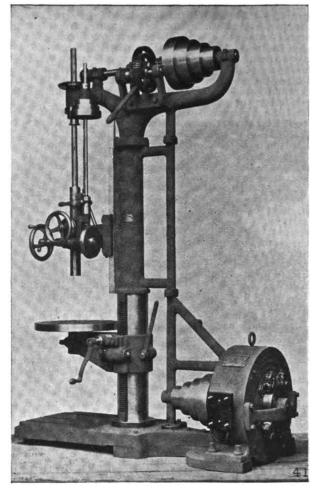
DRILL PRESS DIRECT DRIVEN BY CARD MOTOR.
